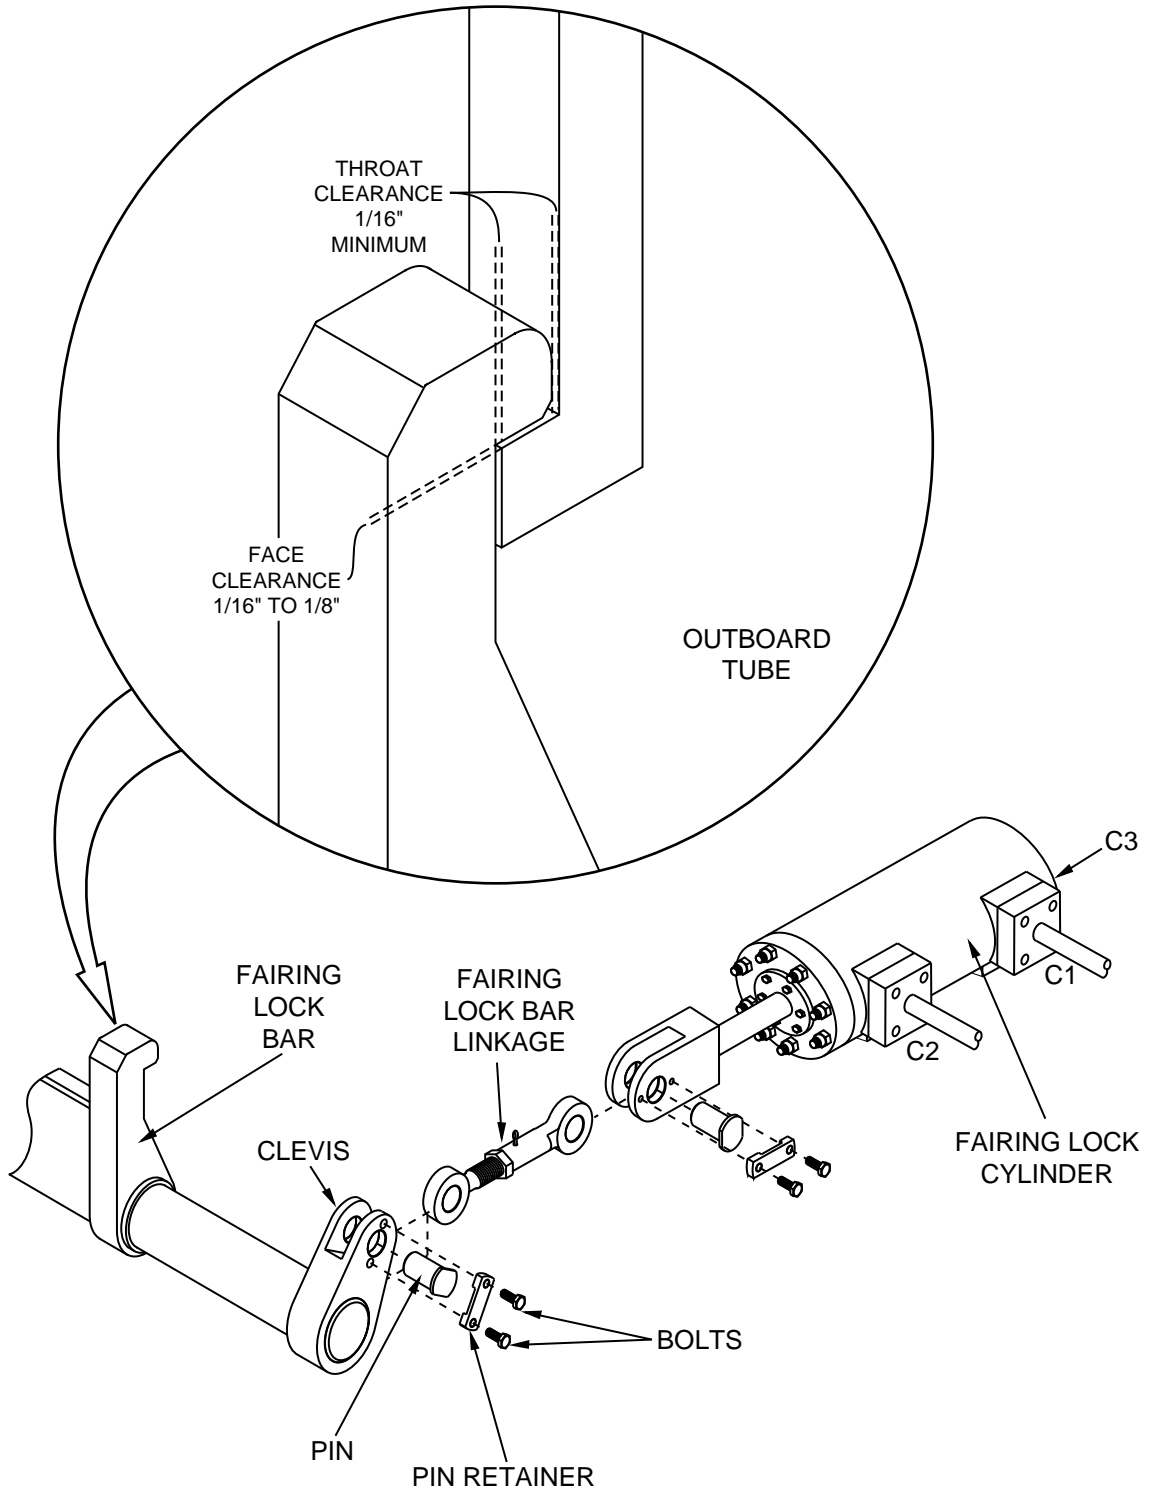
Fairing Locking Mechanism (Typical)
